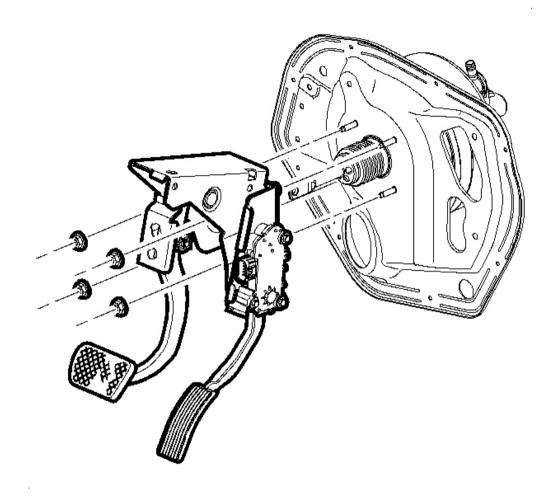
Removing/Installing Brake Pedal Assembly Courtesy of GENERAL MOTORS CORP.
